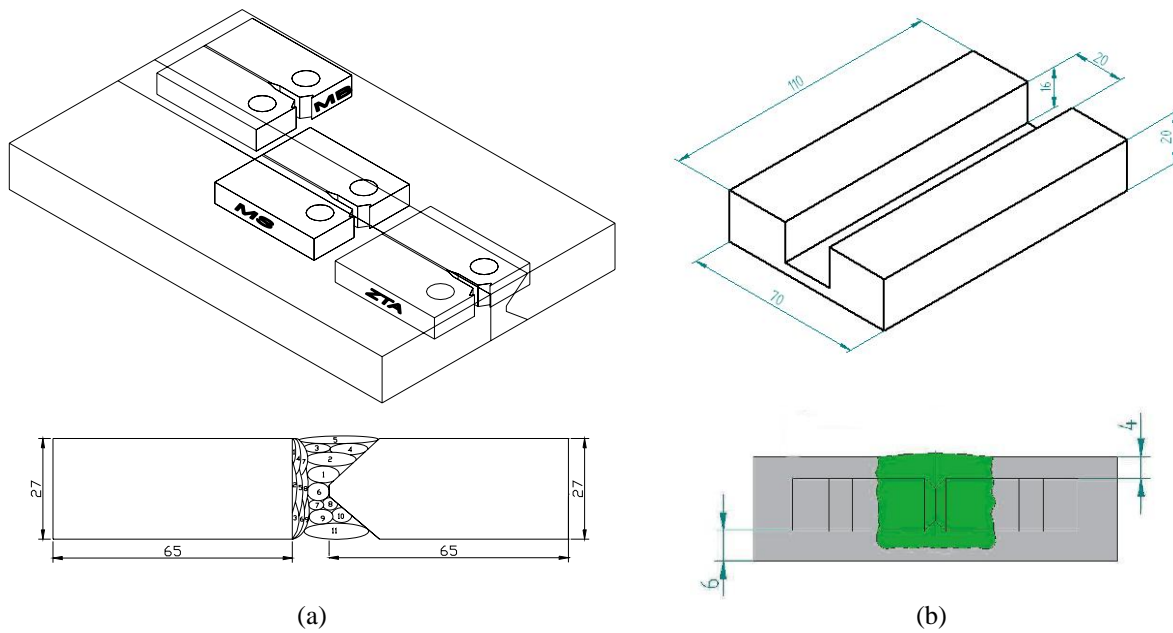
Disposition of the test specimens in a FCAW (a) and GTAW (b) welded joint.
